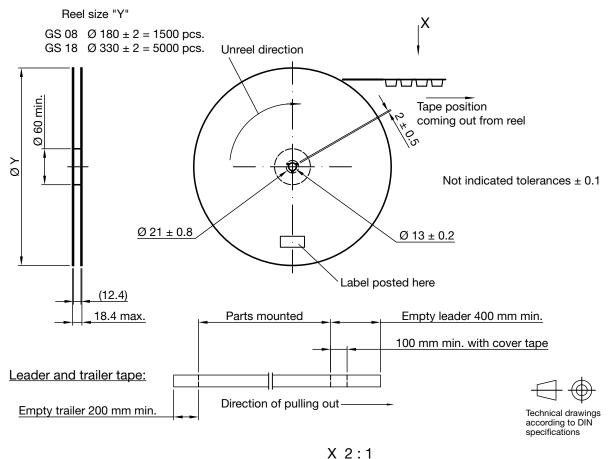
Not indicated tolerances ± 0.1
